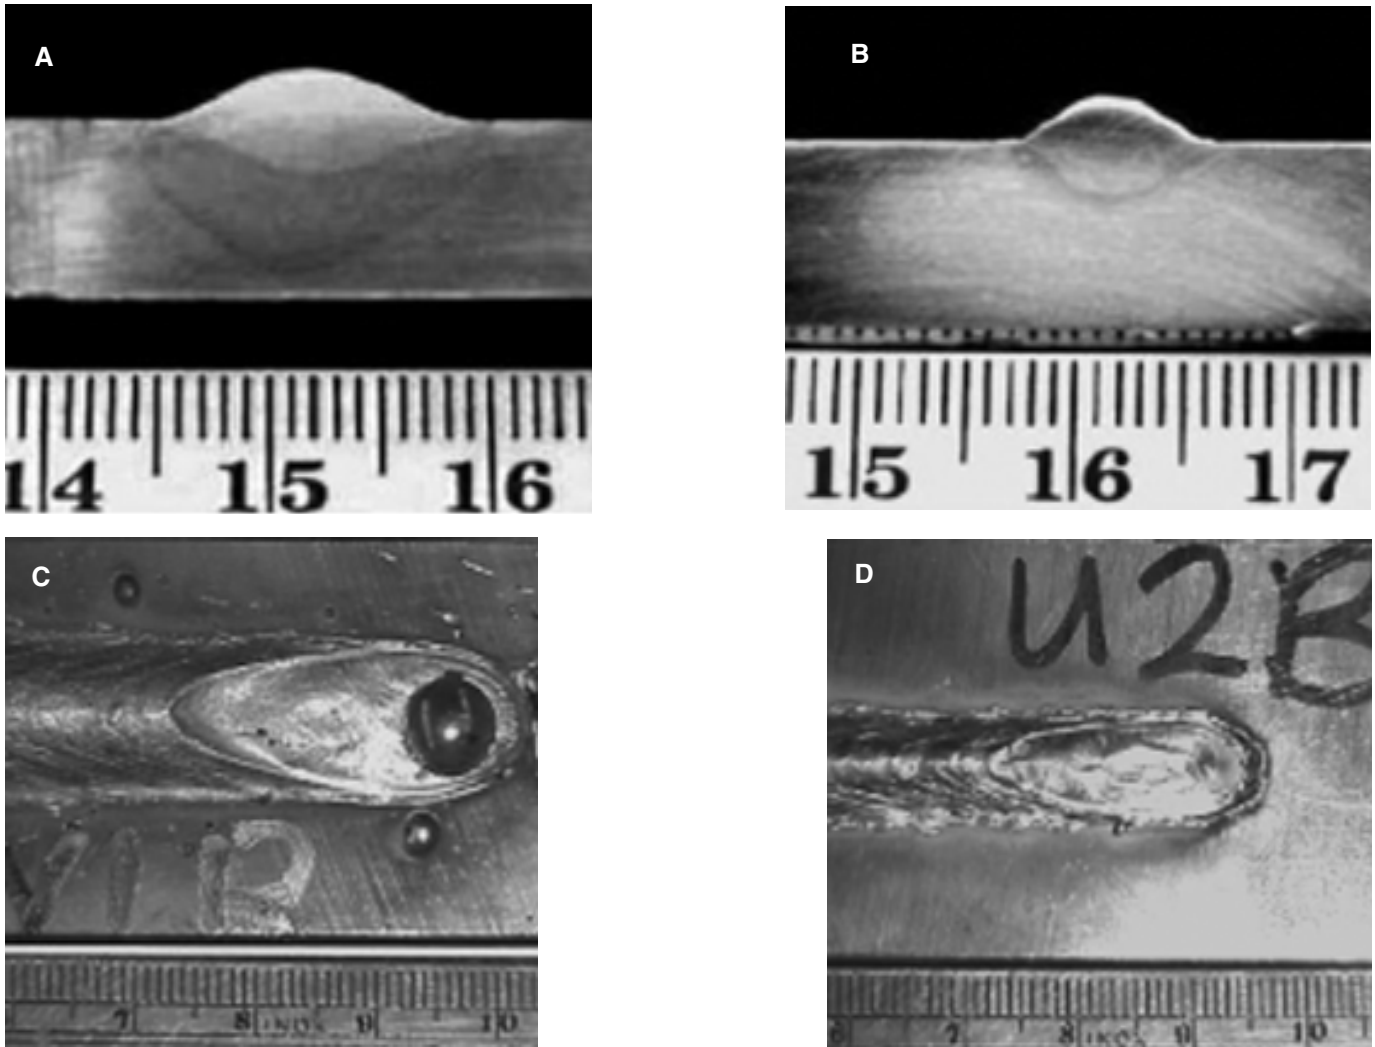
Macrographs of the welded specimens. A — Weld bead cross section V1B; B — weld bead cross section U2B; C — top view of the weld pool V1B; D — top view of the weld pool U2B
